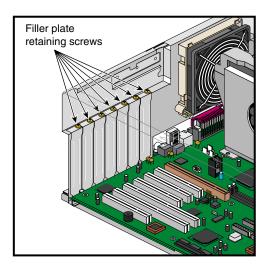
Location of the Retaining Screw for the Expansion Slot Filler Plate
